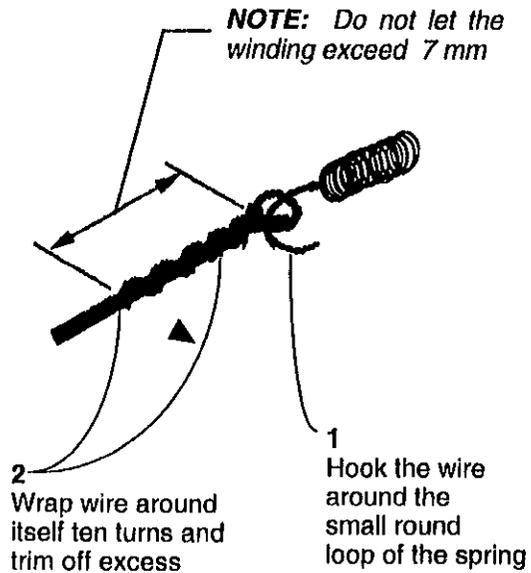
Installing the Transfer Corotron Wire onto the Spring
